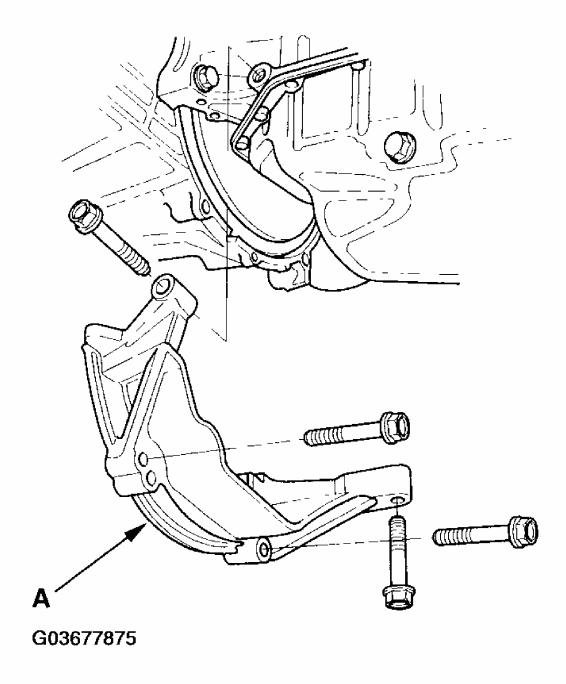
Removing Clutch Cover Courtesy of AMERICAN HONDA MOTOR CO., INC.
